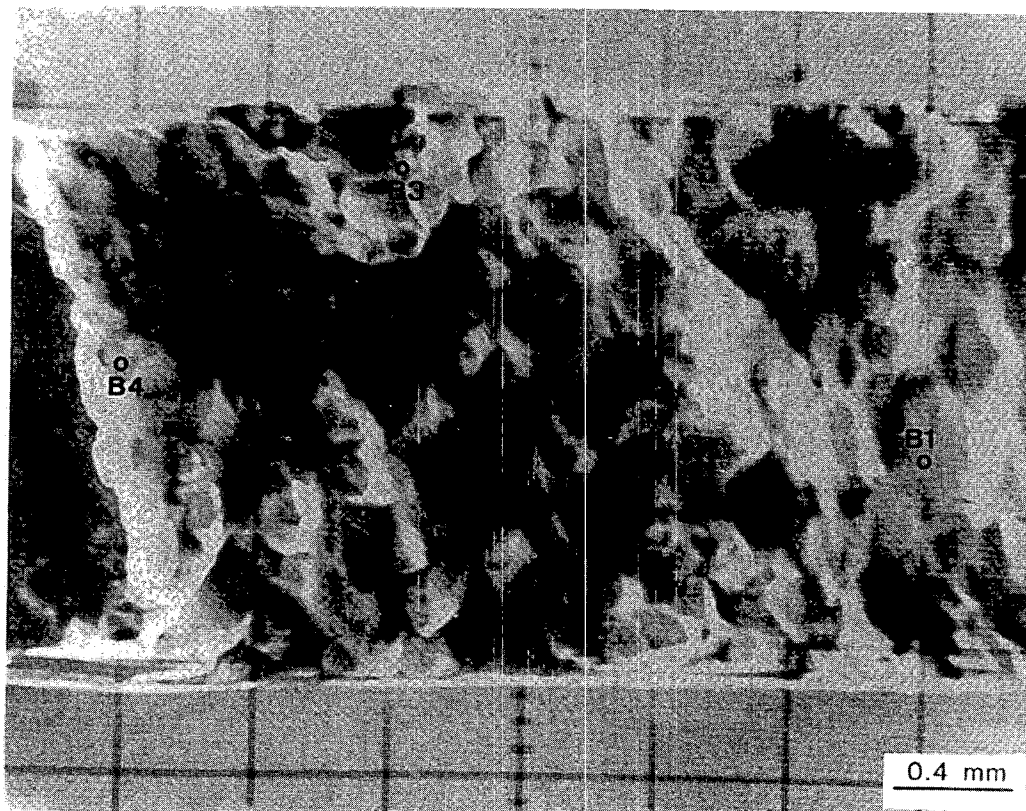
Detailed View of the Section A - A of the Fracture Surface in (6a) and Analyzed by Auger Spectroscopy
